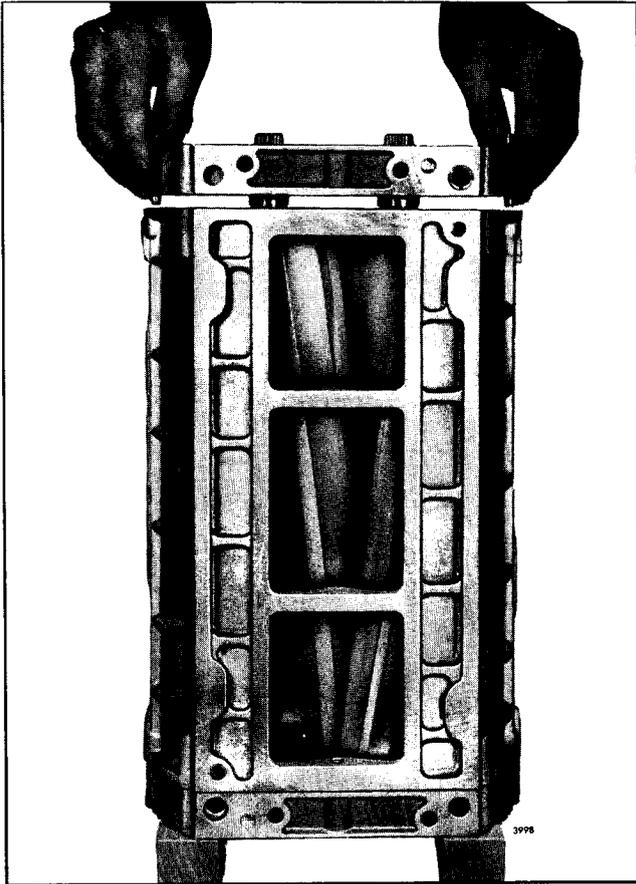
Installing Rear End Plate on Blower Rotors and Housing
